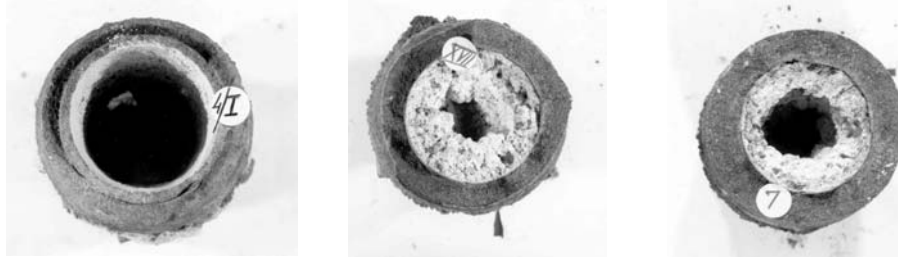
The macro image of SEN and the formed deposit during the casting of different types (D, A and B) of steel
